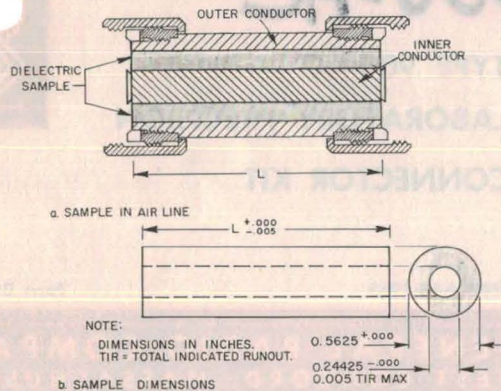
Dielectric sample fabrication for measurement inside GR900 custom air line.
